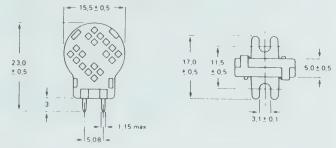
Dimensional drawing of the humidity sensor. Dimensions in mm.
